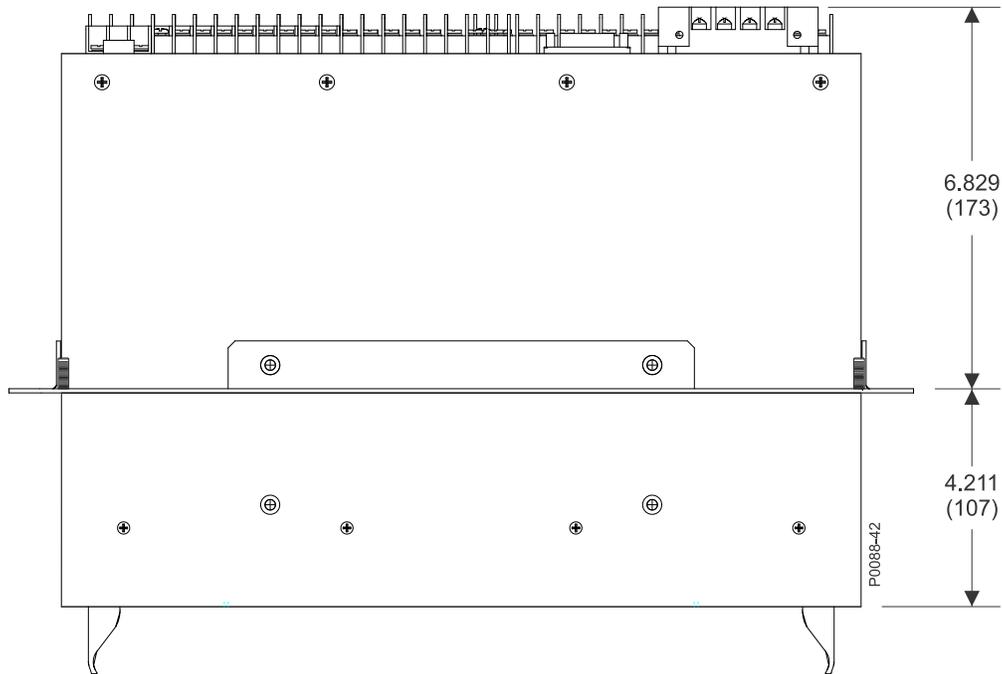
Top View of DECS-400 with Escutcheon Plate Installed
